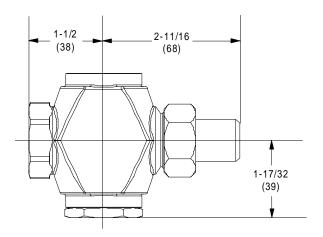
1/2 in. Normally Closed Union Globe VG7000 Series Bronze Control Valve Dimensions, in. (mm)
